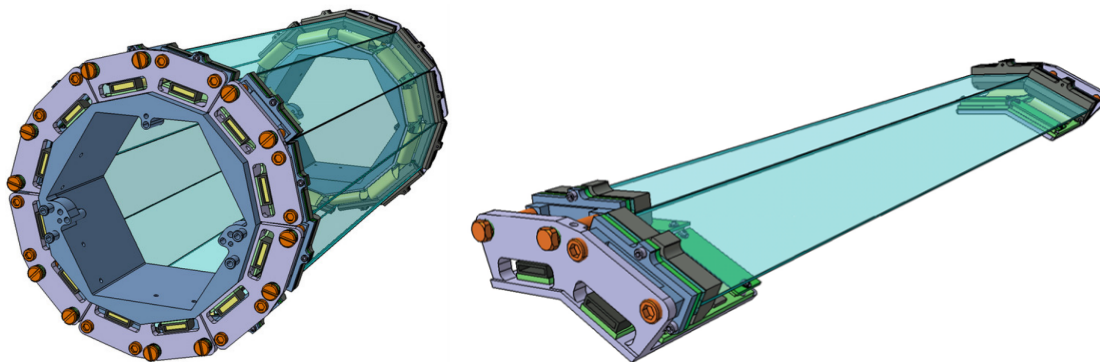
CAD drawing of the fibre detector. Drawing taken from Ref. [118].
